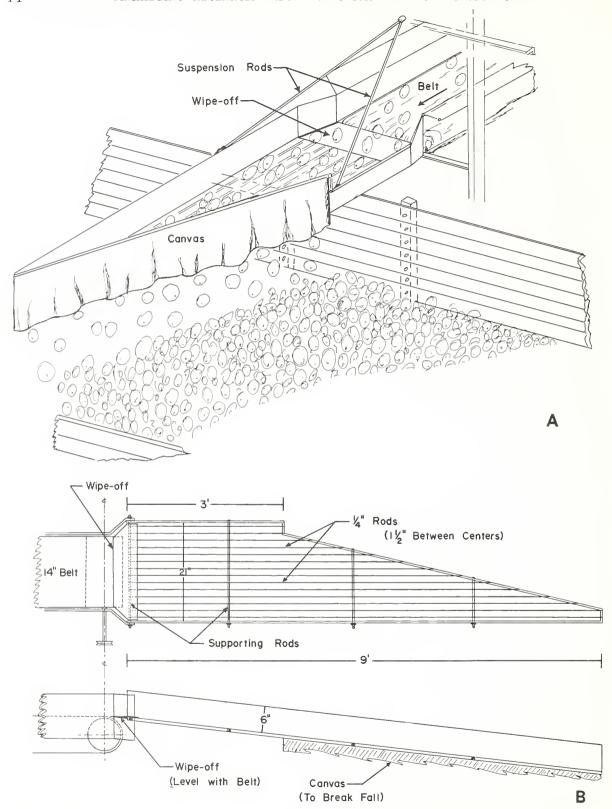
Construction details of "angled" chute attached to vertical elevator for bulk loading of fruit into semitrailer.
